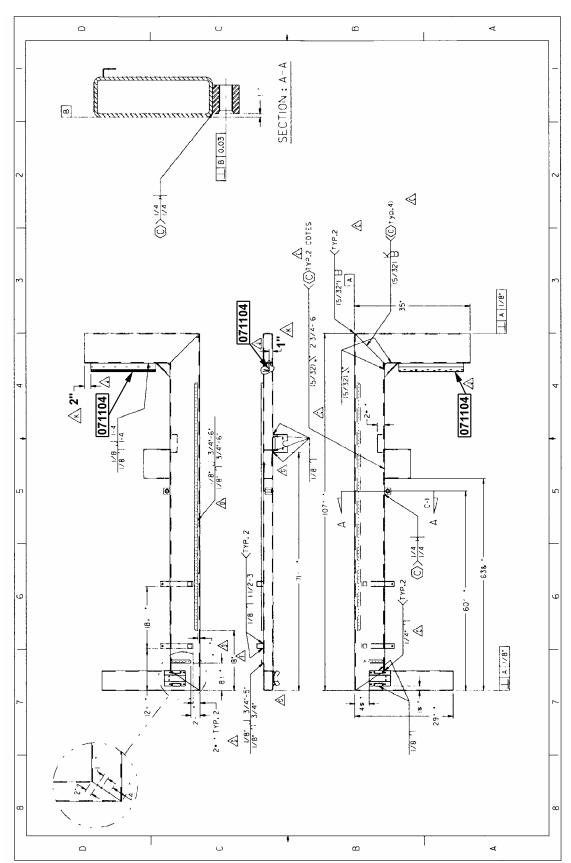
LONGITUDINAL MEMBER LEFT HAND LATERAL BRACKET INSTALLATION
